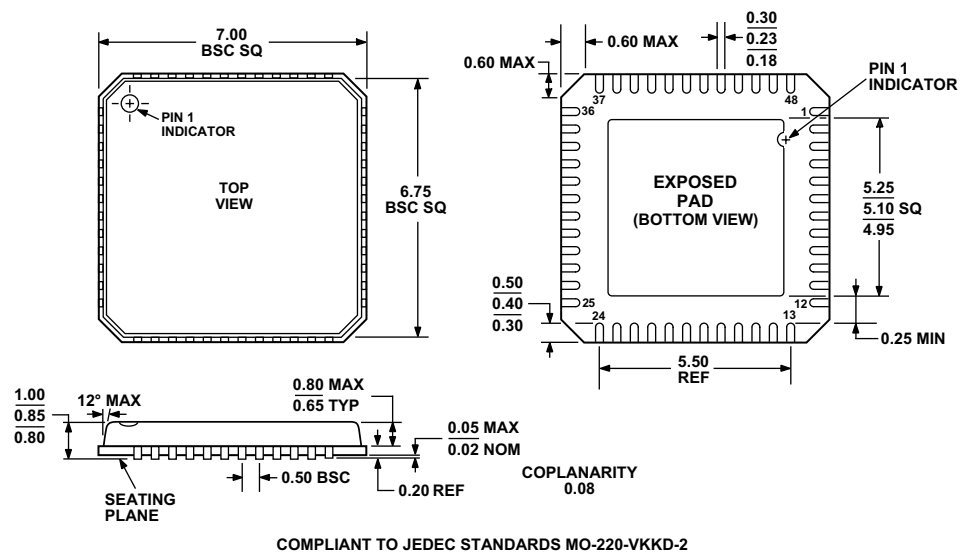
48-Lead, Lead Frame Chip Scale Package [LFCS_P_VQ]
